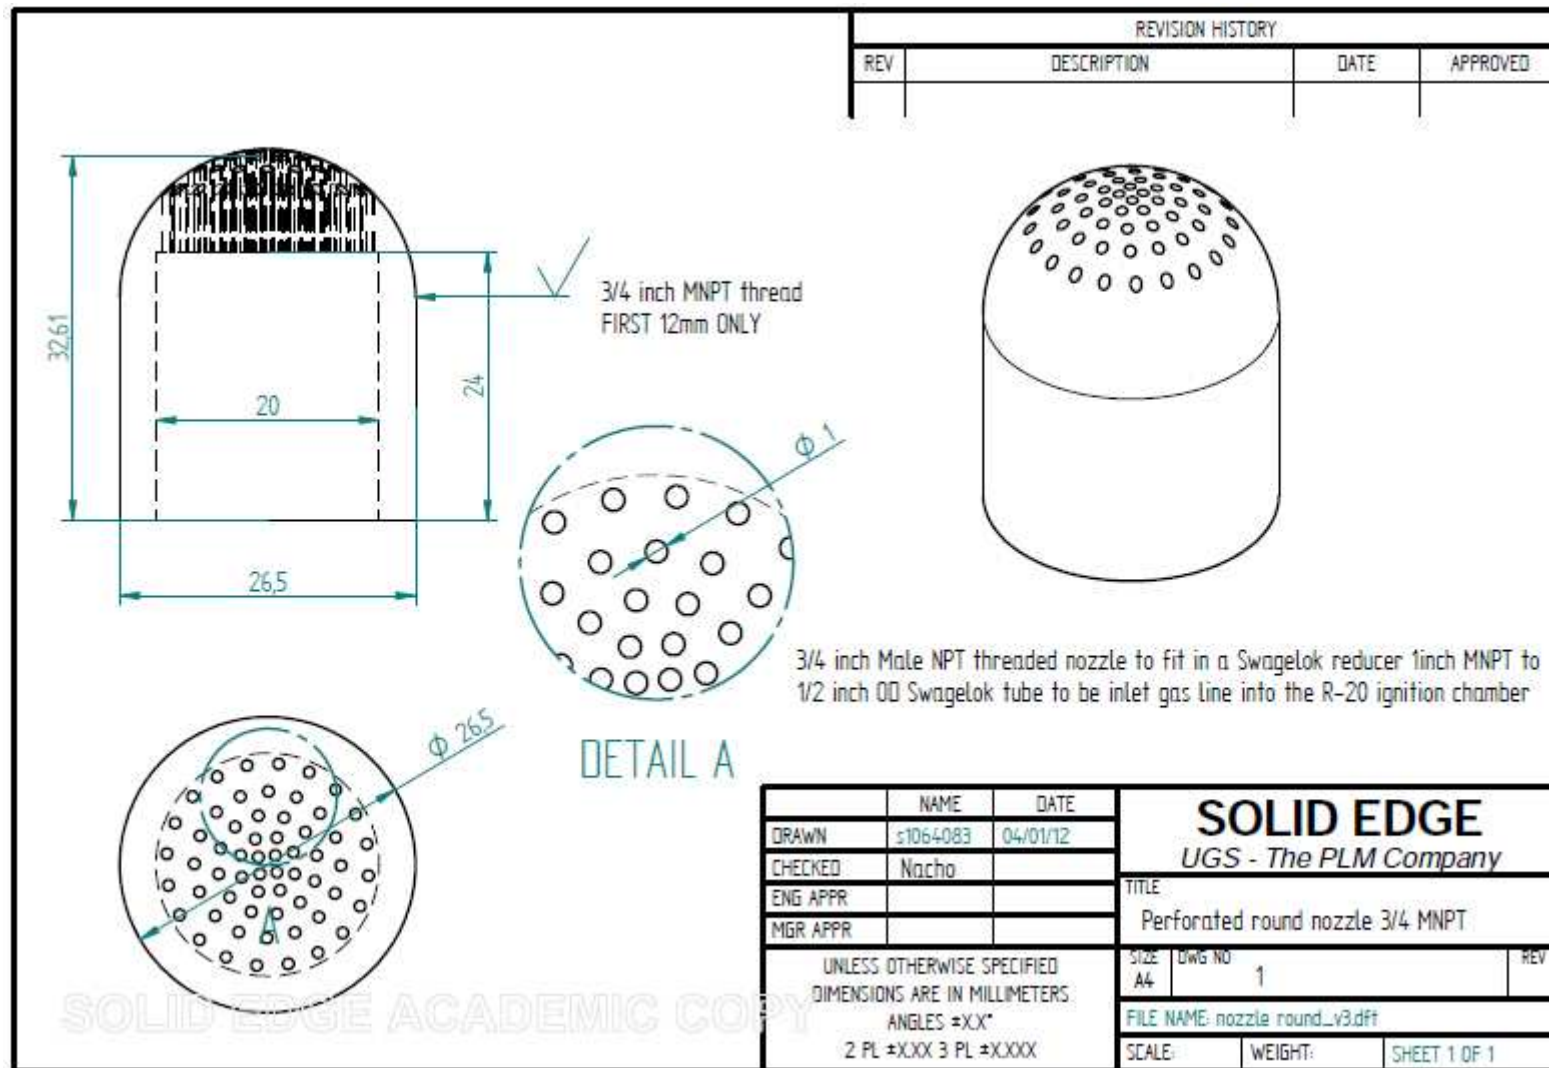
Drawing of Perforated round nozzle 3/4 inch MNPT
